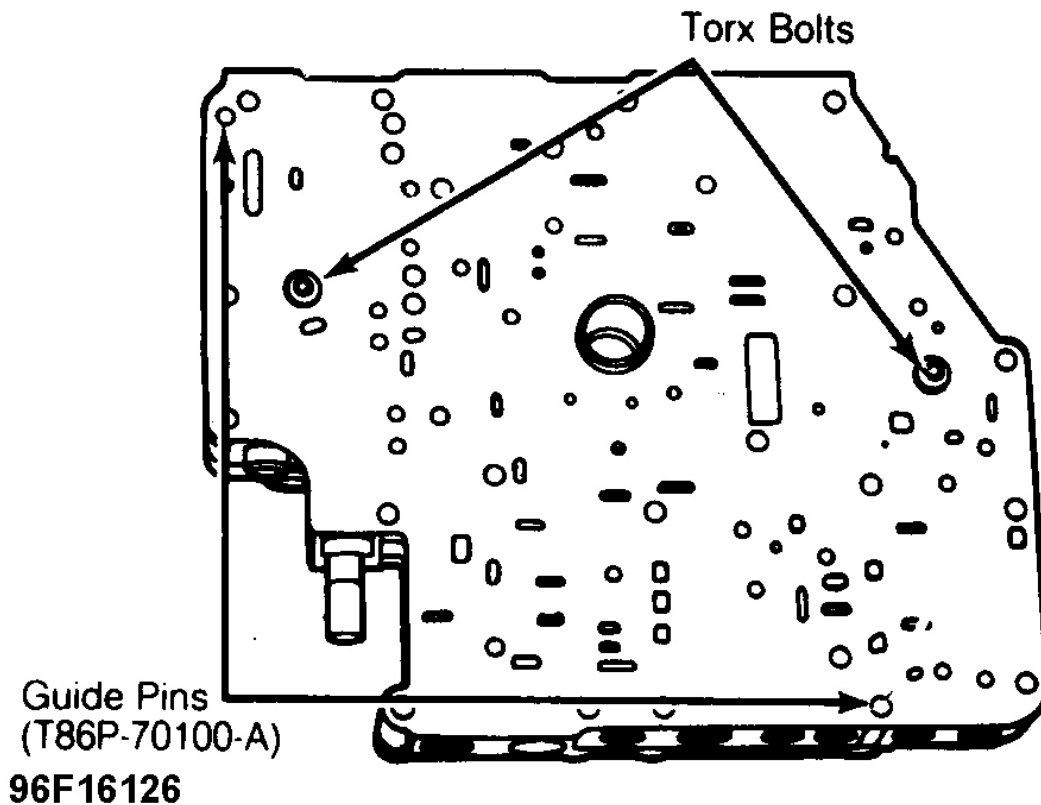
Valve Body-to-Separator Plate Guide Pin Locations
